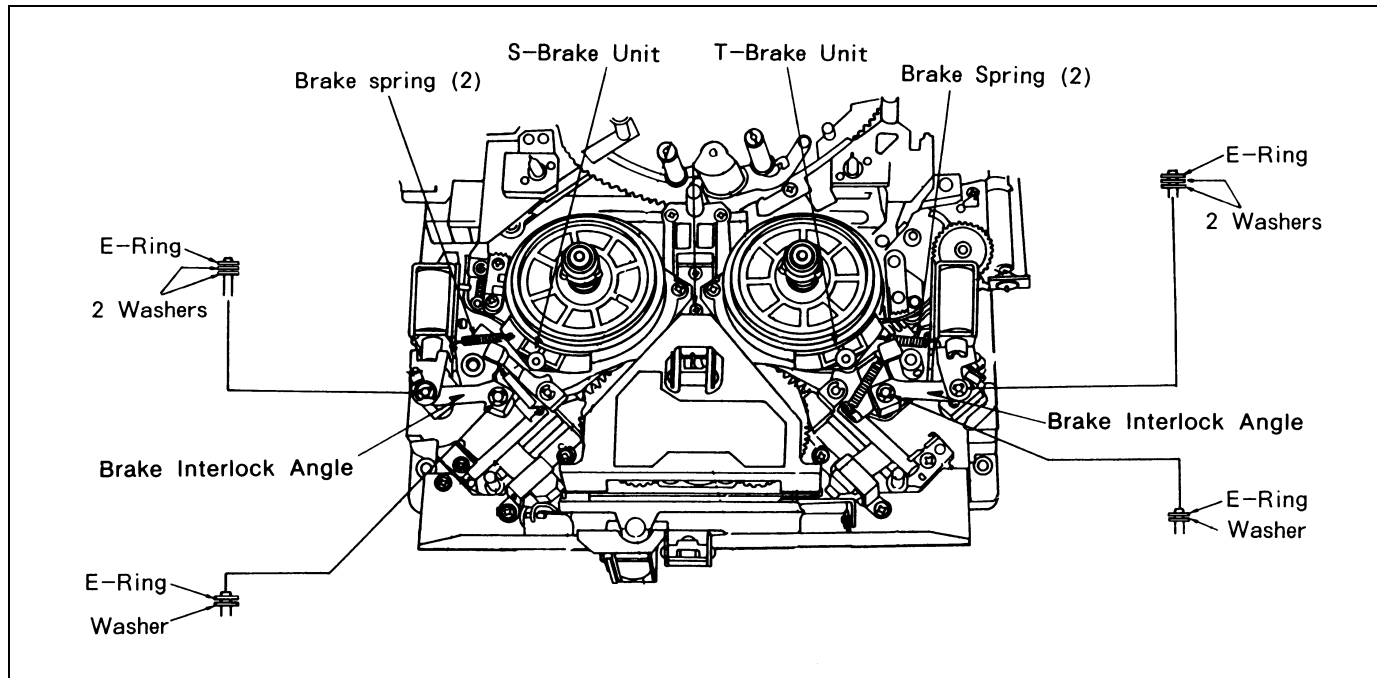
Removal of S-Brake Unit or T-Brake Unit
